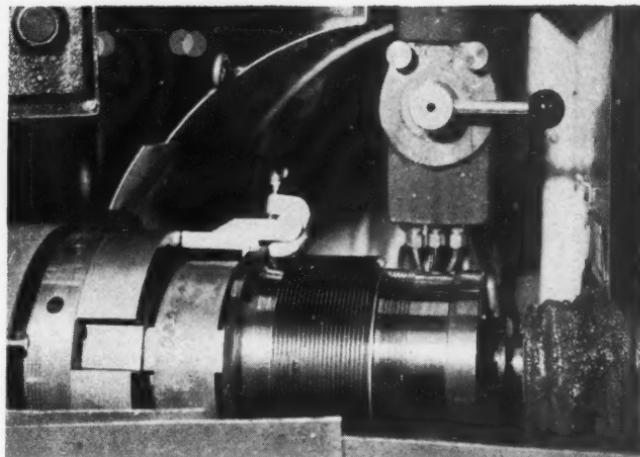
The Thread for the Cylinder Head is Produced by Generating with a Grinding Wheel. Each Thread is Accurate within 0.0002 Inch on the Diameter and within 30 Seconds on the Angle
